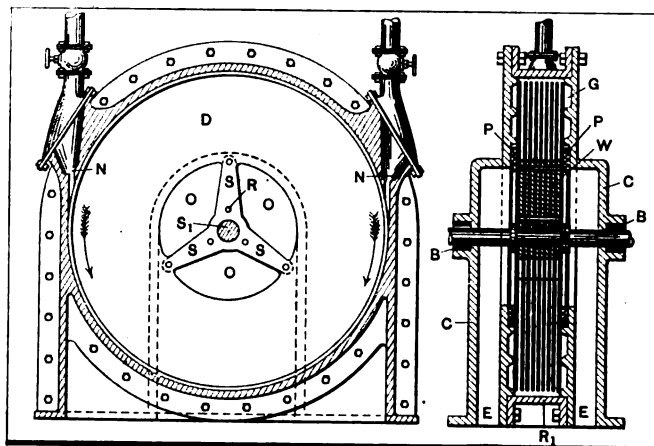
Cross-section of Tesla engine for reversible steam drive
